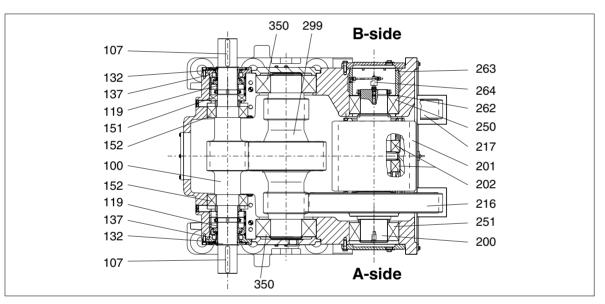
Spare-parts drawing 2/2 for drive version A/x, B/x, C/x
